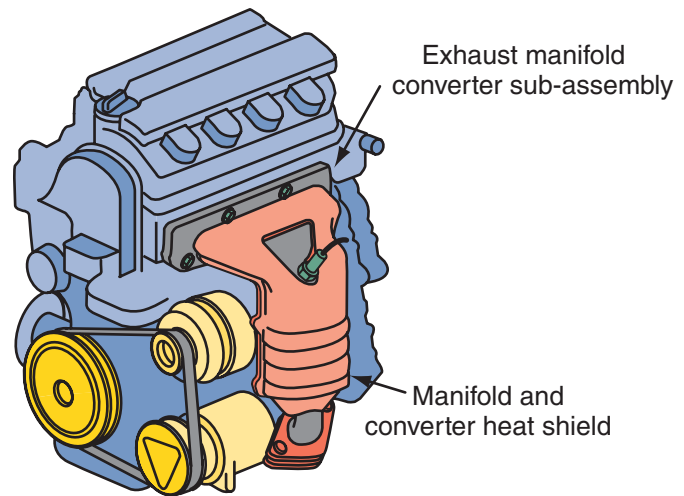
Exhaust manifold and heat shield for a four-cylinder engine.
